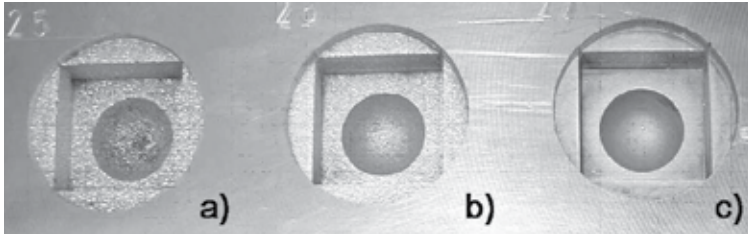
Workpieces obtained after the operations of roughing (a), semifinishing (b), finishing (c)
